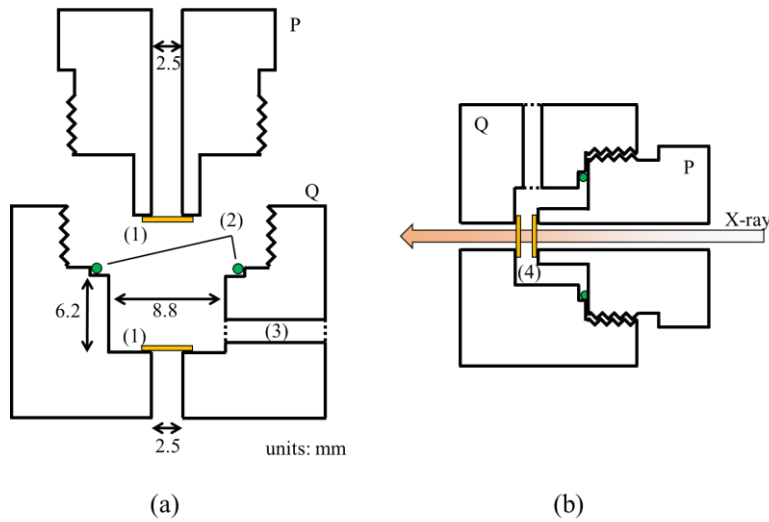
Design of sample holder composed of two parts P and Q. (a) shows details of each part; (1) diamond windows, (2) sealing O-ring and (3) sample injection hole. (b) shows the assembled sample holder with two parts of P and Q. Space (4) is the sample holding space and the distance between pair of diamond disks determines the sample length, 1.6 mm.
